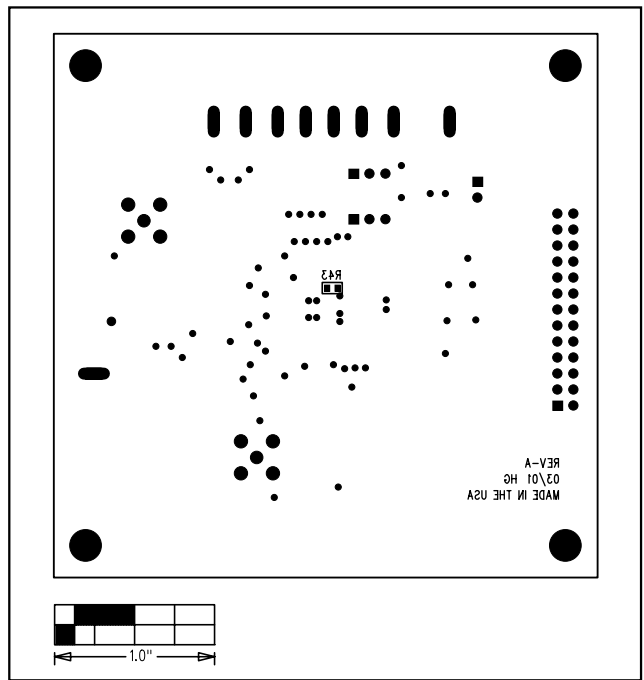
MAX1420 EV Kit Component Placement Guide—Solder Side
